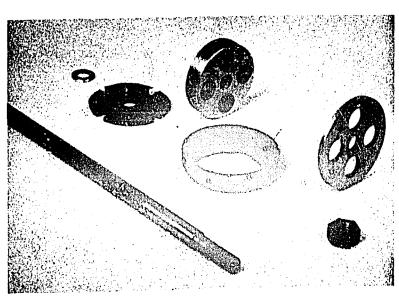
DISASSEMBLED SERRATED FLAPPER VALVE AND PLUNGER
